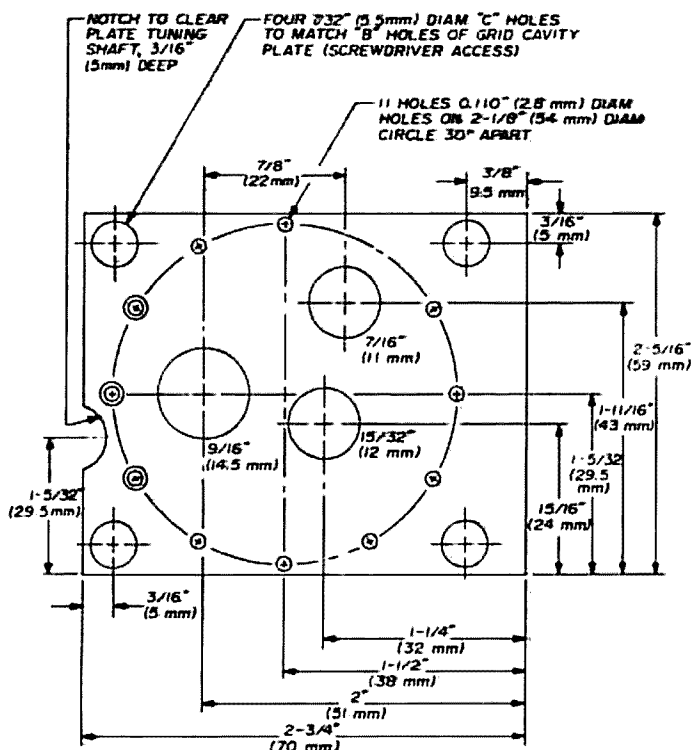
Cathode partition. Holes marked with letter C are screwdriver clearance holes to facilitate assembly. Material is 0.093" (2.5mm) brass.
